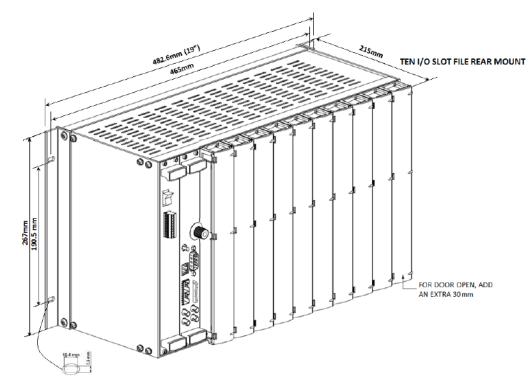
Ten I/O Slot File Rear Mount Dimensions
